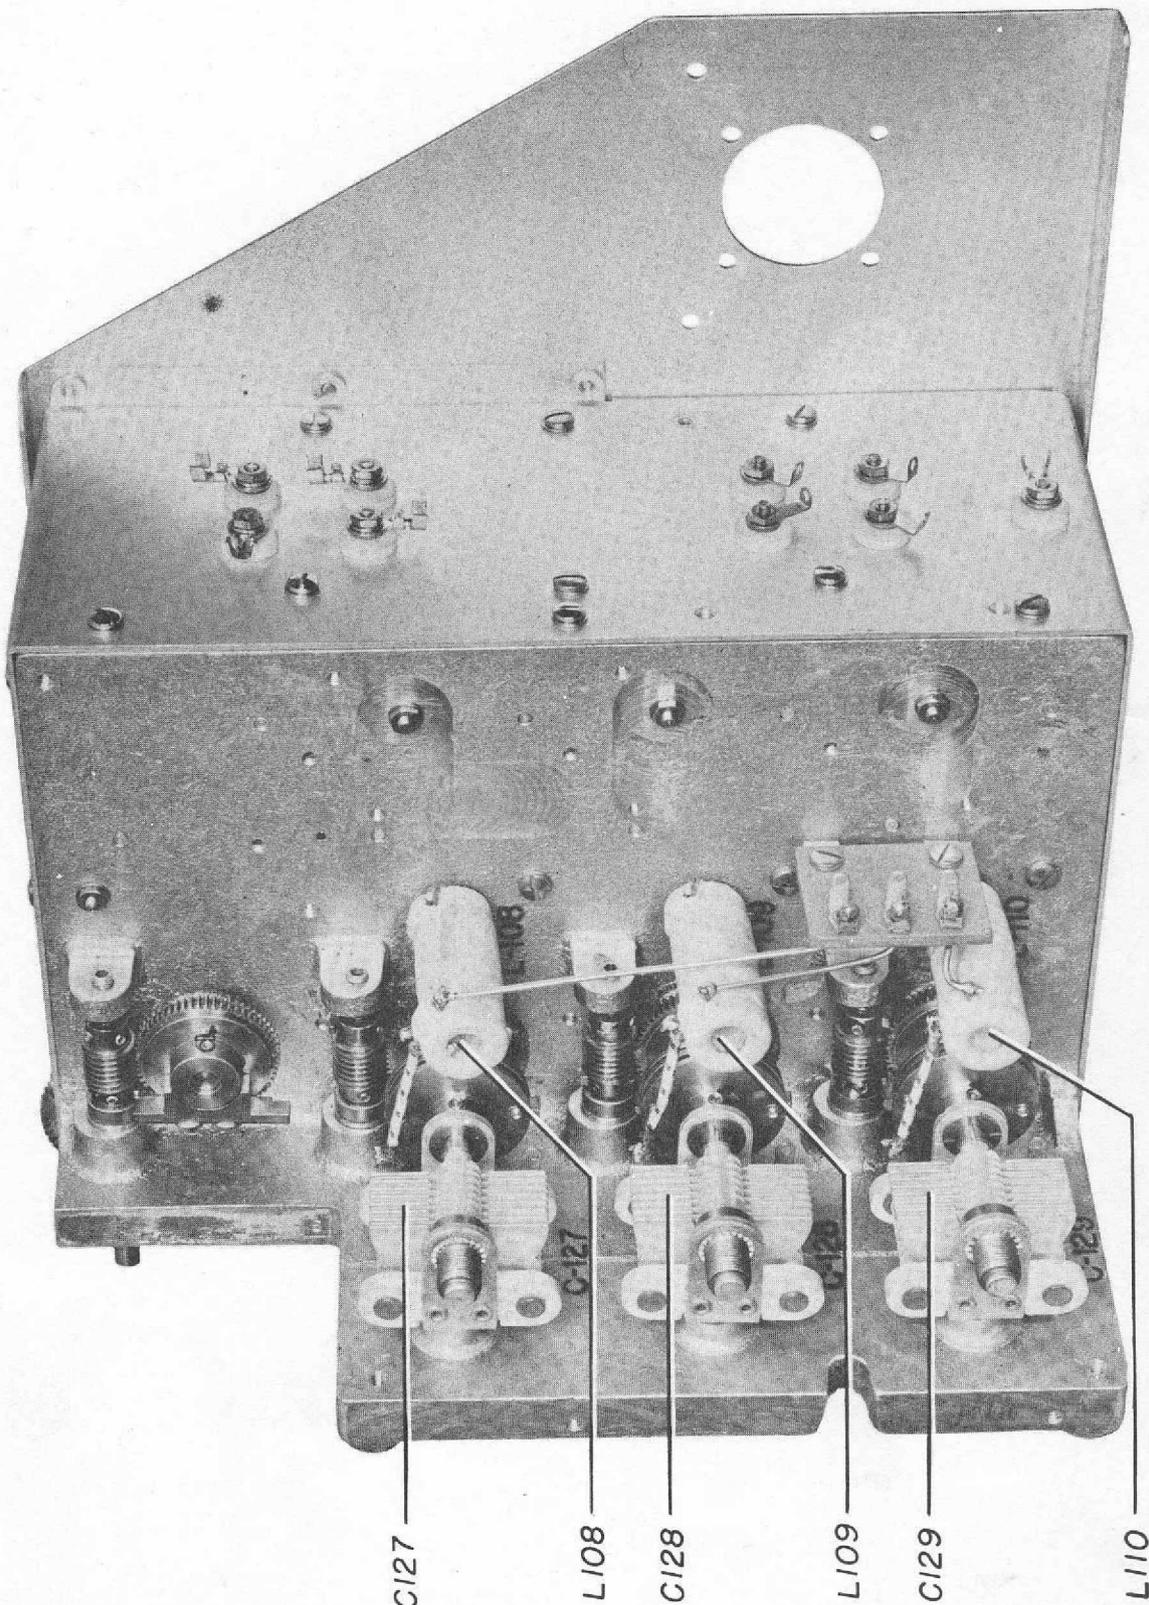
FRONT VIEW OSCILLATOR ASSEMBLY
